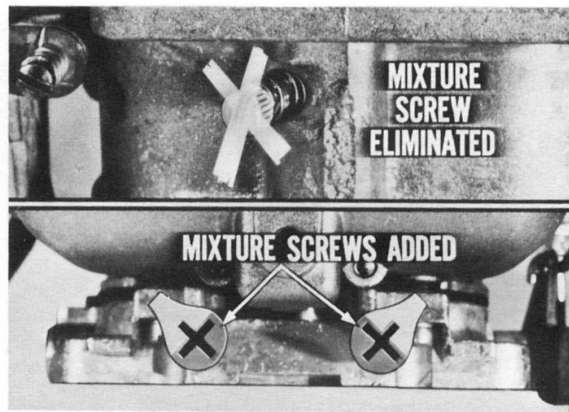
New $1\frac{1}{2}$ " BBD carburetor mixture screws
